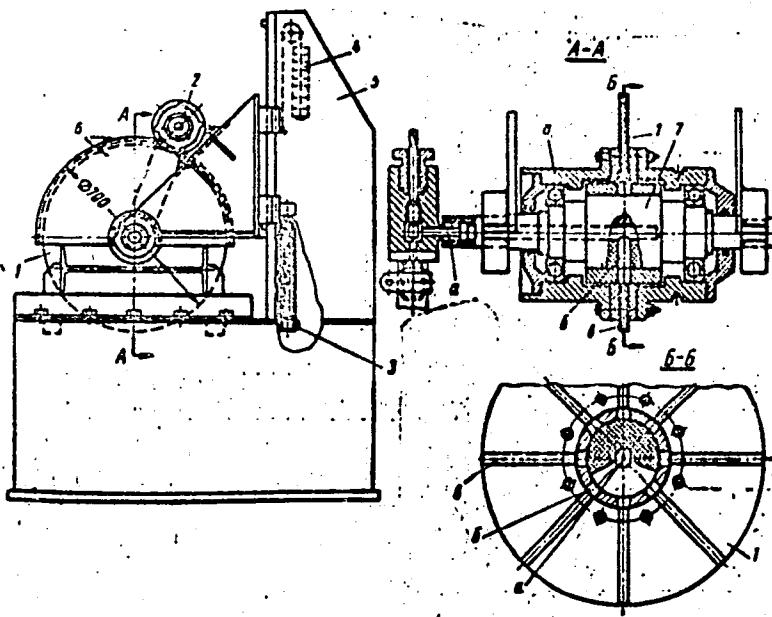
Machine for air metal-arc cutter (general and side views): 1 - disk electrode; 2 - disk servo-rotor; 3 - disk servo-feed; 4 - counterweight; 5 - frame; 6 - disk casing; 7 - axis; 8 - connecting piece.
